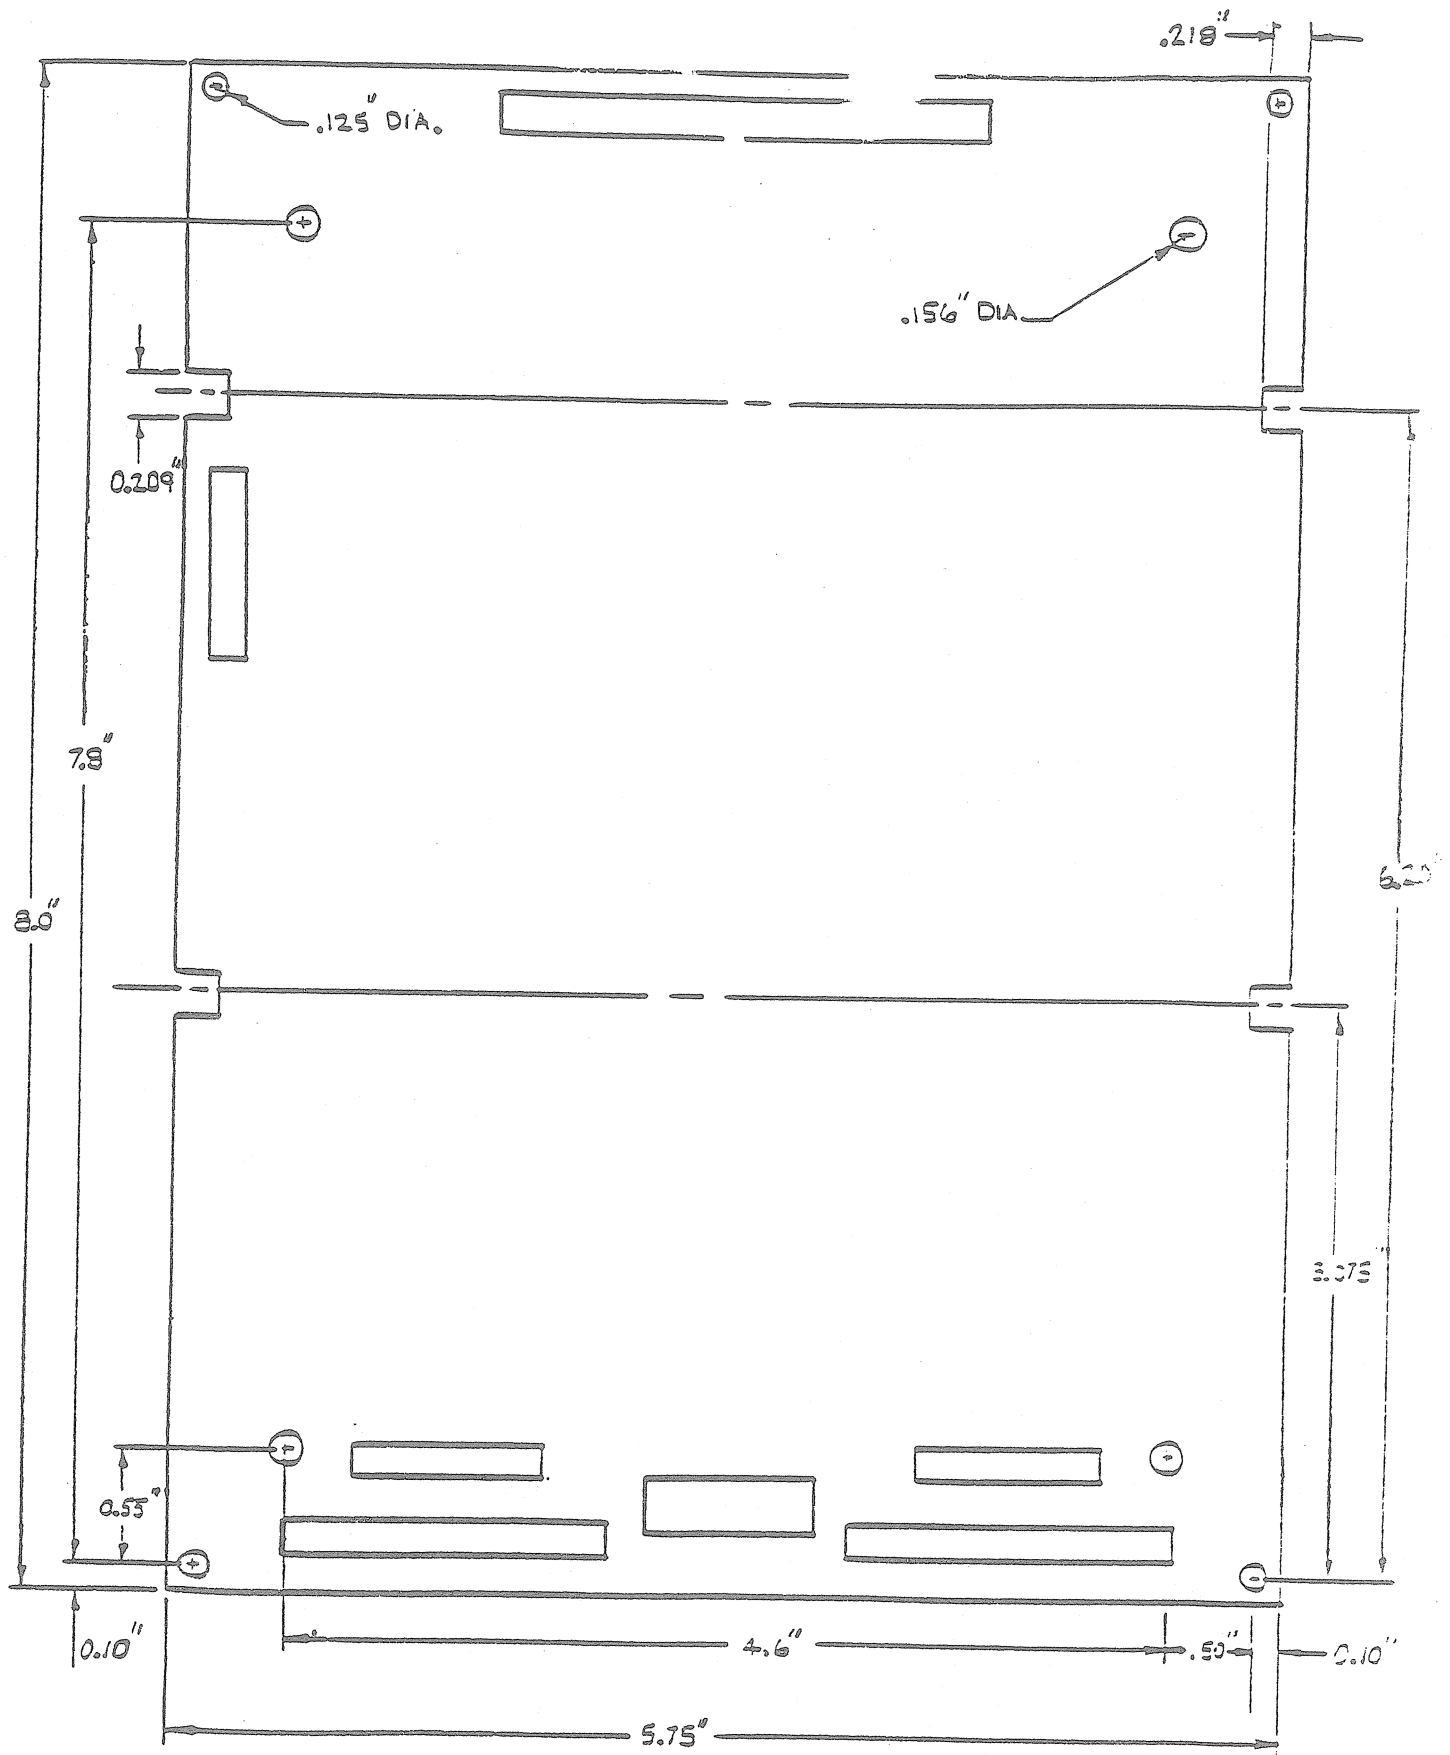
CONTROLLER BOARD DIMENSIONS
